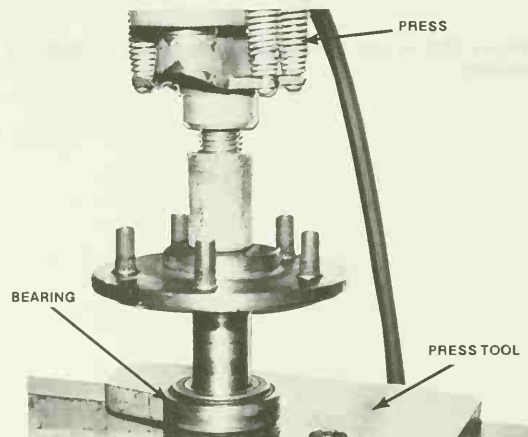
The new bearing is pressed on by pressing the axle shaft through the bearing. (Nissan Motor Corporation in USA)
